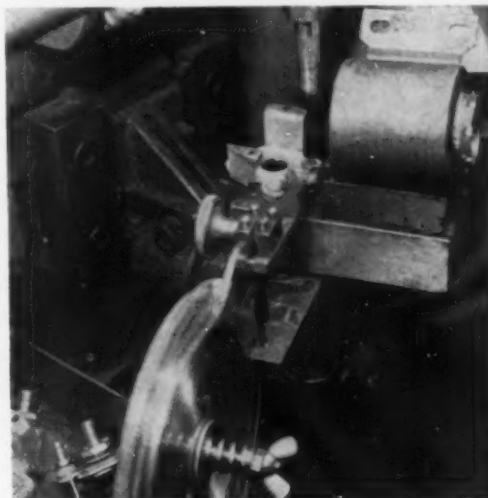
A two series electrode, the one on the left is a dummy and the other is molybdenum-tipped. A copper ground wire from the coil is welded to the zinc-plated steel spool flange in this setup.
